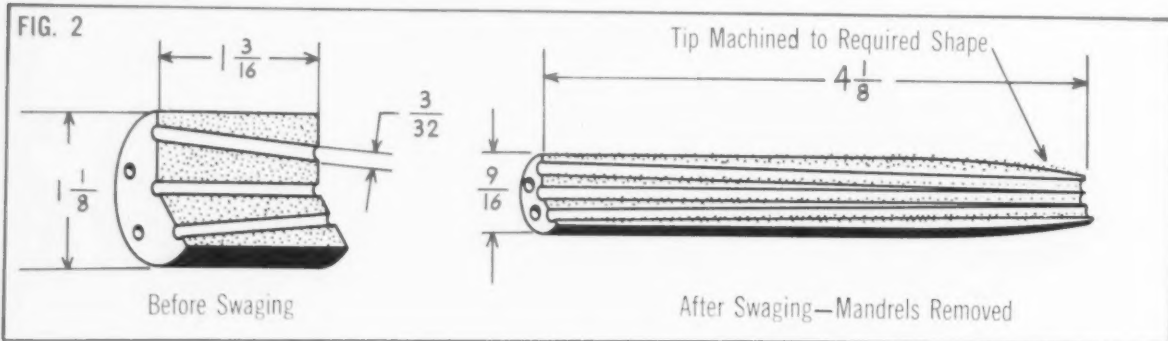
Welding torch tips are precision-swaged in one minute each. Wire mandrels maintain hole dimension.
